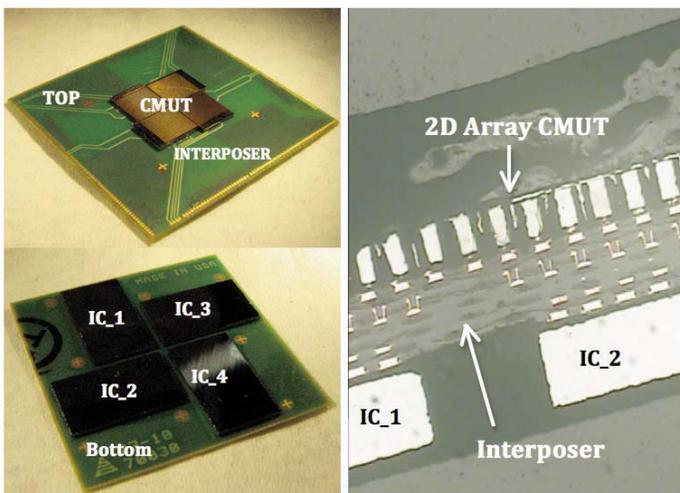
3D stack (left) and cross-section (right) of CMUT-Interposer-IC assembly integrated using flip-chip bonding technology.
